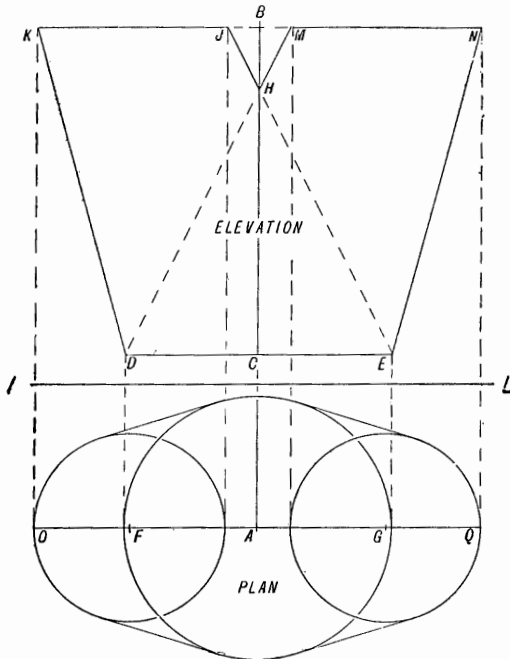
The Plan and Elevation of a Fitting as Shown at Fig. 97.
